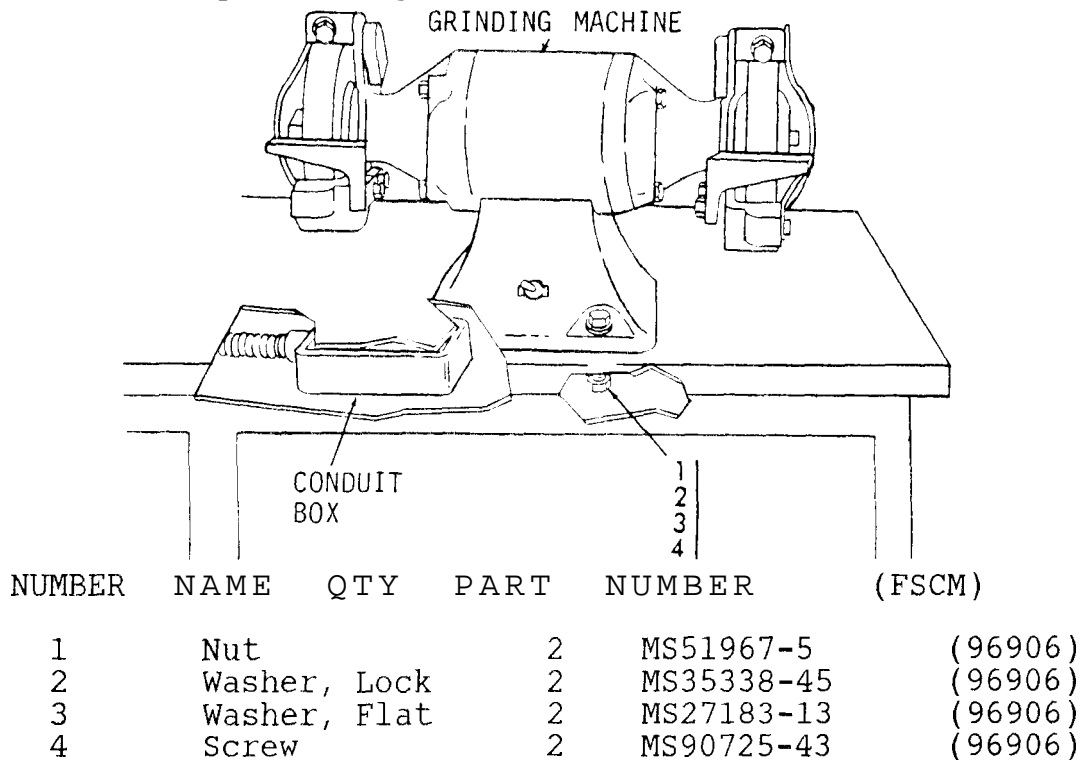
Disconnecting Conduit Box and Removing Utility Grinding Machine.
